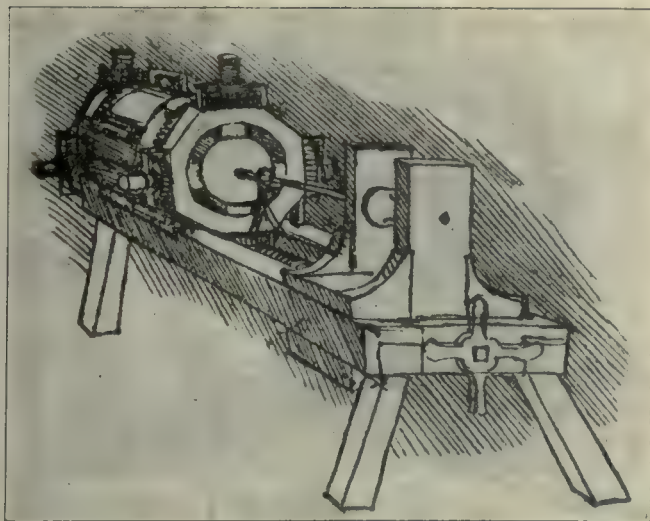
A HORIZONTAL BORING MACHINE BY LEONARDO DA VINCI
